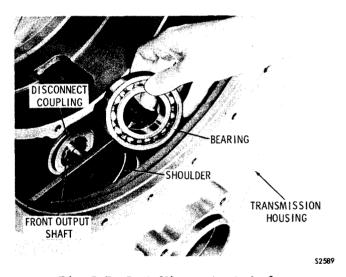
Installing output shaft center bearing (-1 models with two-piece output shaft)
